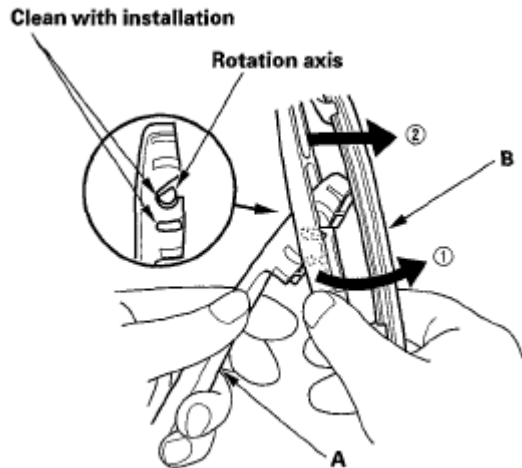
Holding Rear Window Wiper Arm And Blade Assembly
